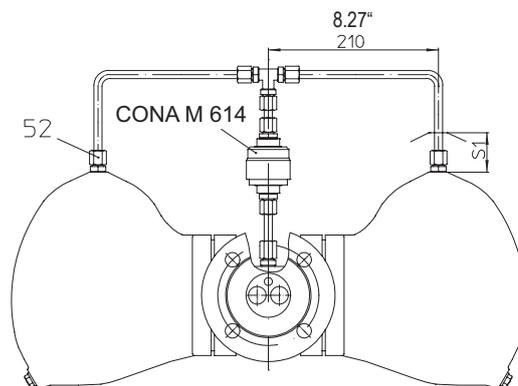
1 with flanges - horizontal installation and äußere Entlüftung
